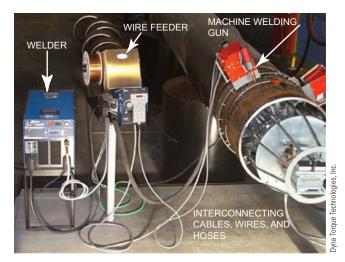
Typical interconnecting cables and wires for a semiautomatic GMA welding station.
